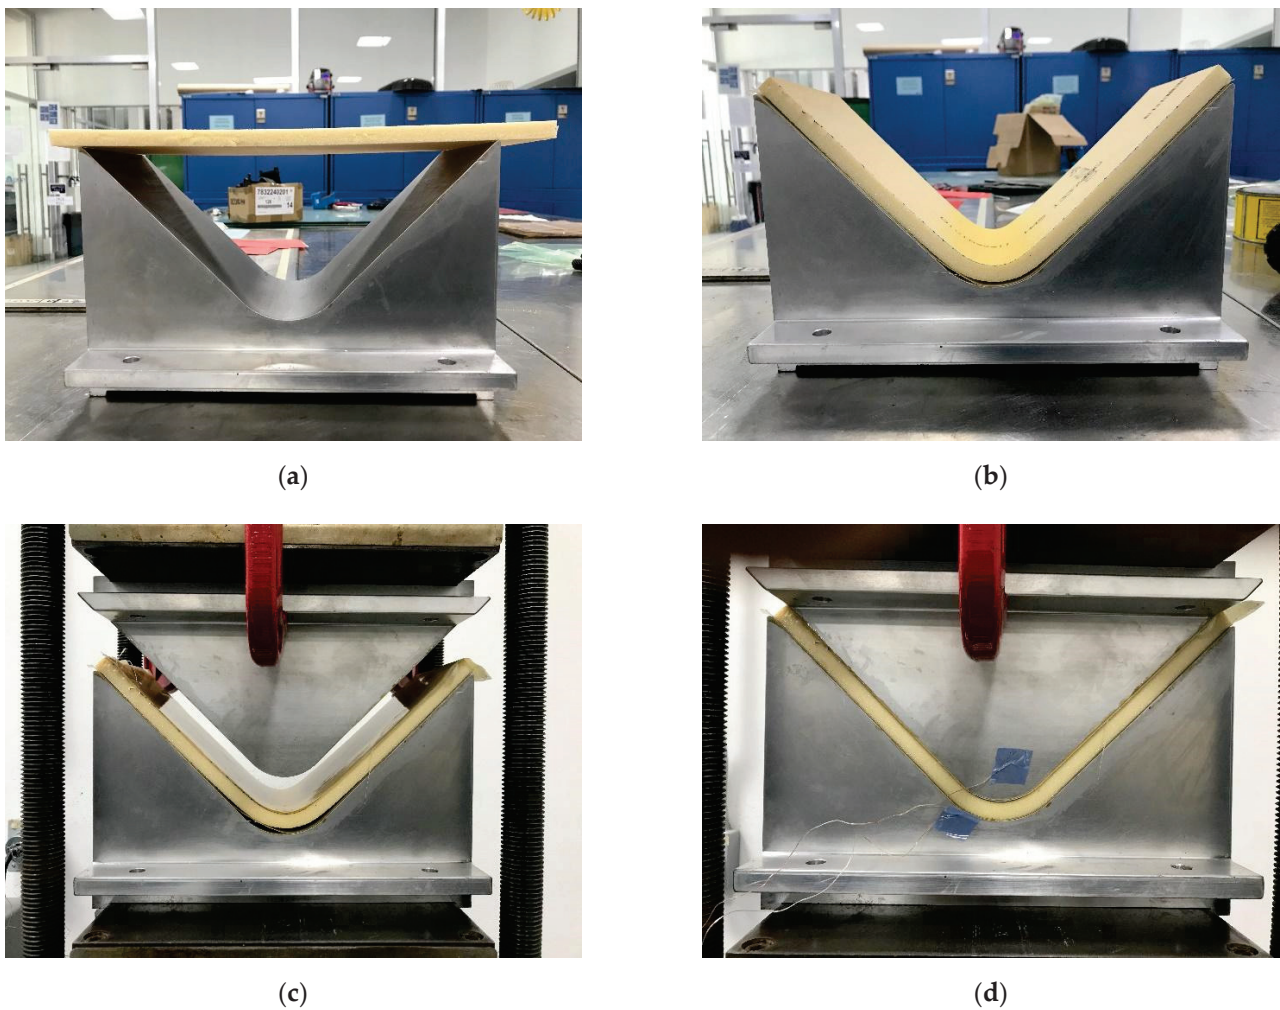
Schematic representation of the V-shaped mold to produce the foam sandwich panels: (a) Unbending foam specimen, (b) foam specimen adapted to the V-shaped mold, (c) preheated process, and (d) manufacturing of V-shaped foam panel.
